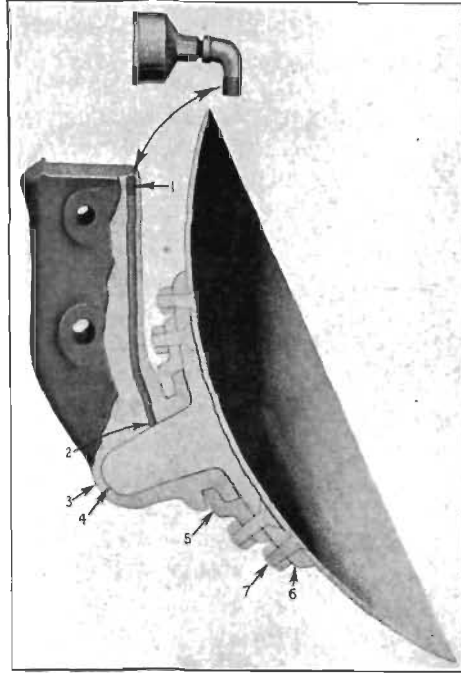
Cross-section of cone-type disk-plow bearing: 1, point where grease cup is attached; 2, oil tube; 3, cup for cone; 4, cone; 5, flange to hold bearing in place; 6, disk casting to hold disk blade; 7, bolt to hold disk blade.
